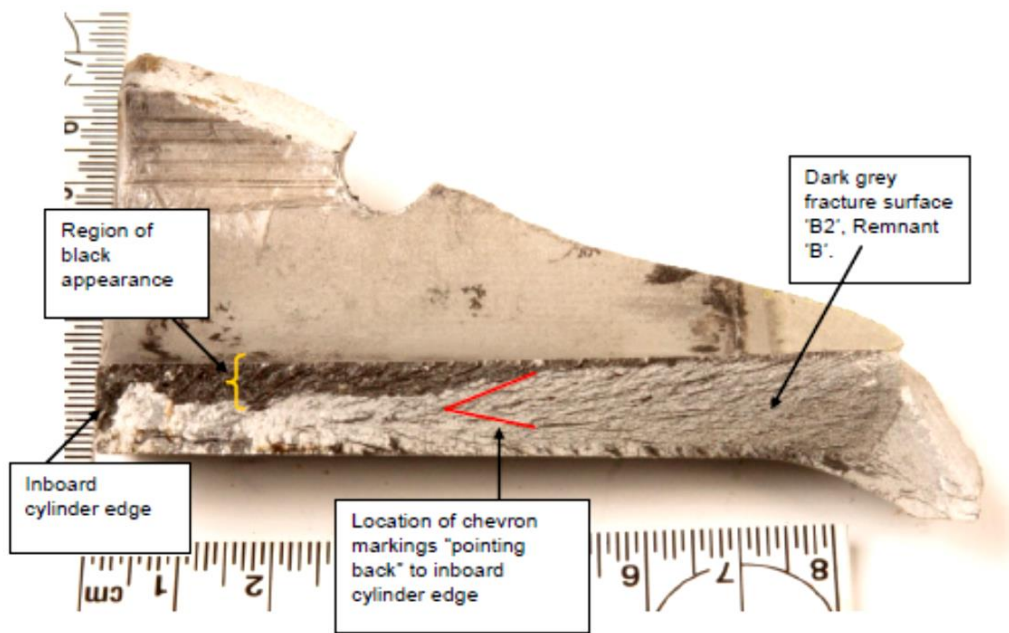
Showing the as received remnant 'B' of the undercarriage cylinder and fracture surface 'B2'.
